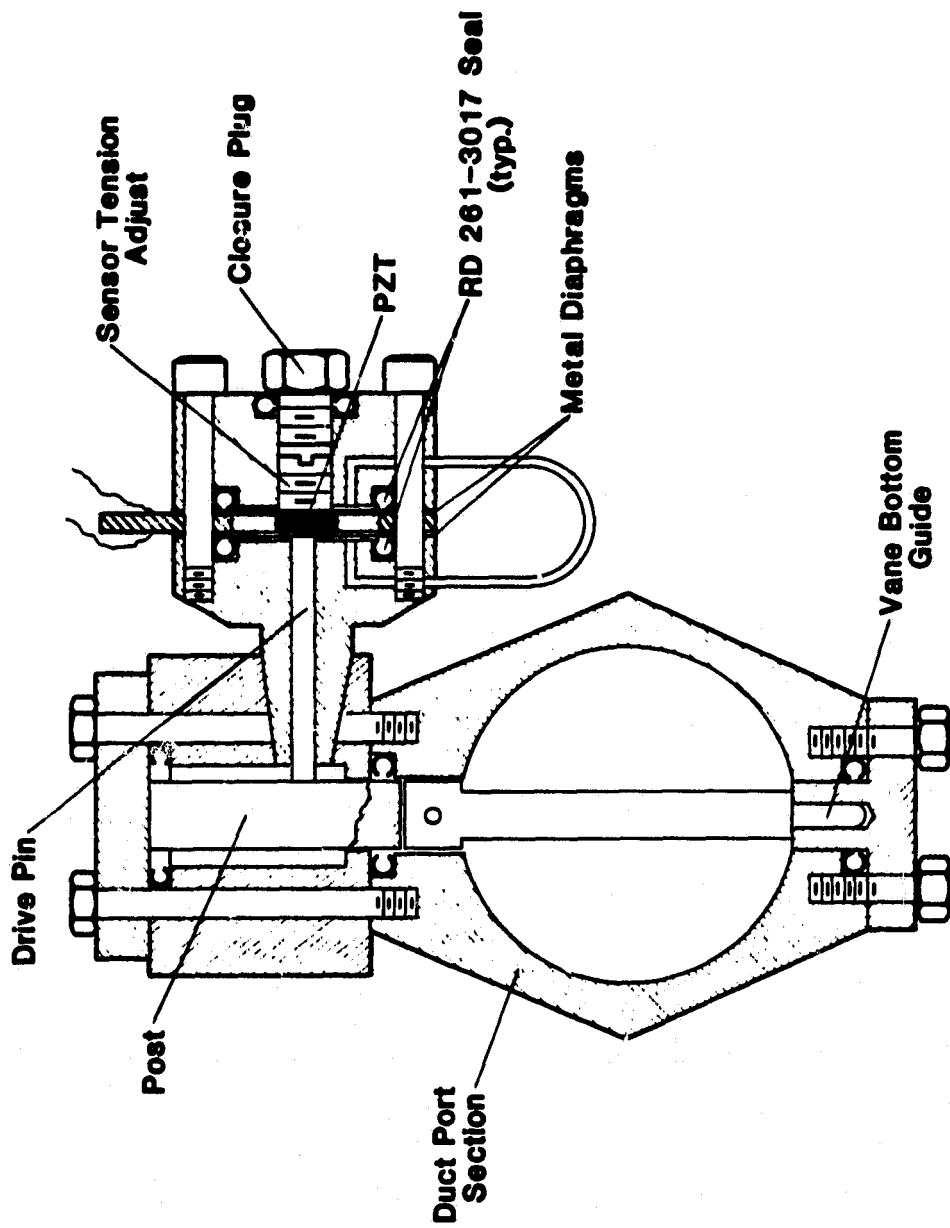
A scale drawing of the meter design for cryogenic service with a side drive sensor.
